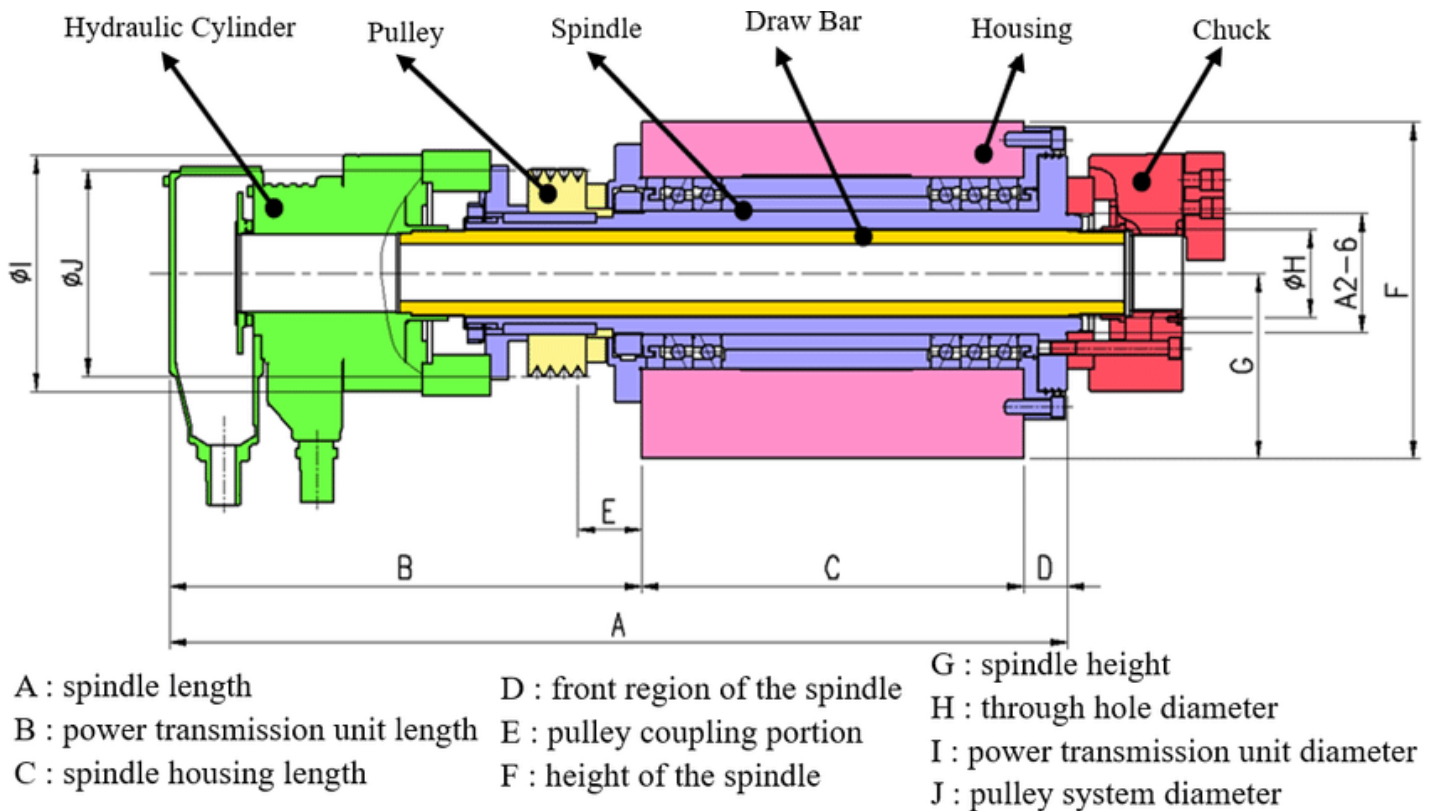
Conventional headstock schematic of hydraulic operated CNC lathe [1]
